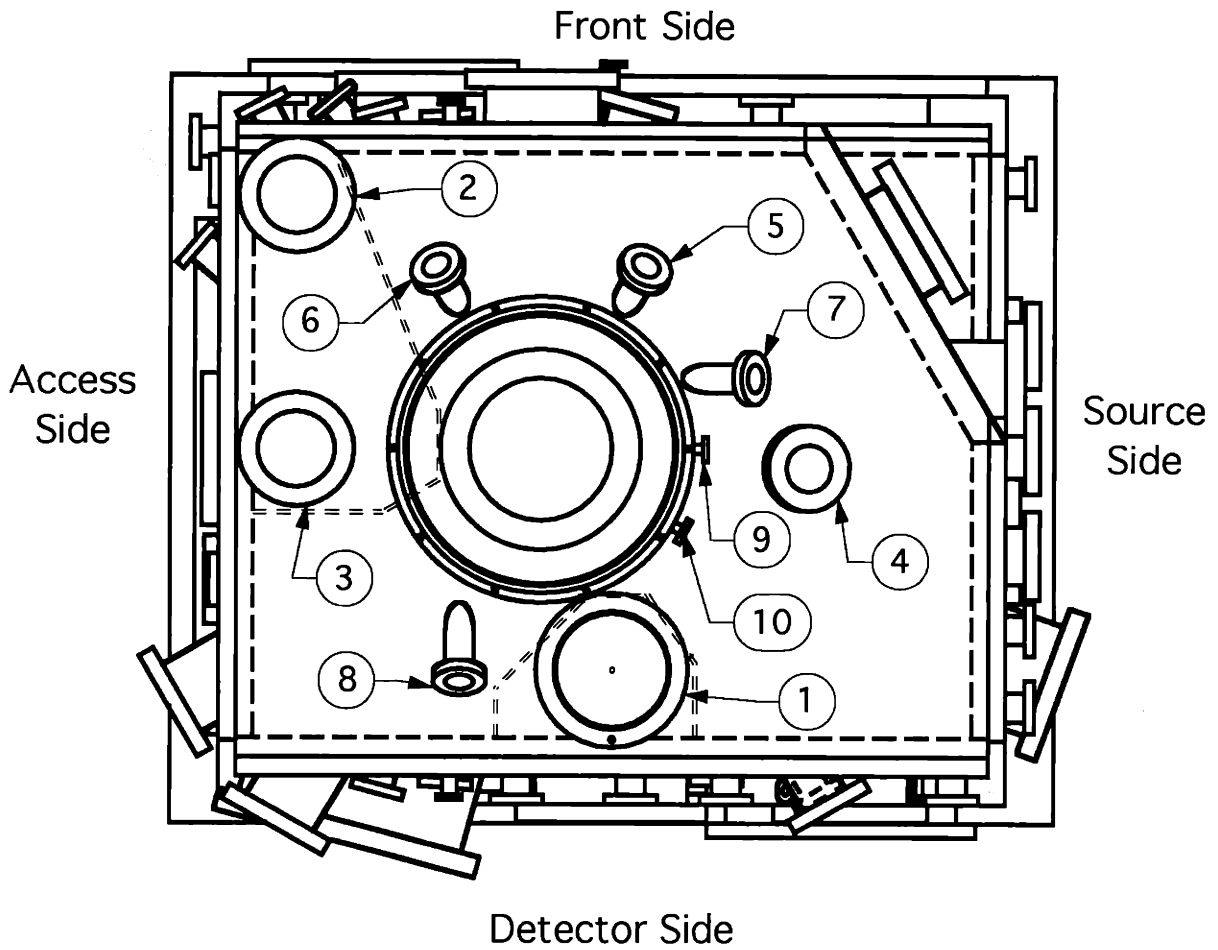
External layout of the Top side of the primary welded assembly.
